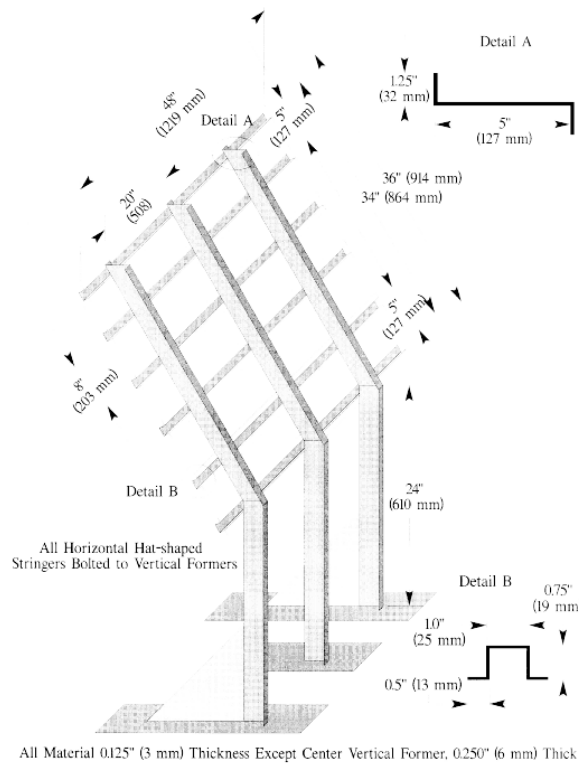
Burnthrough Test Apparatus Specimen Holder
